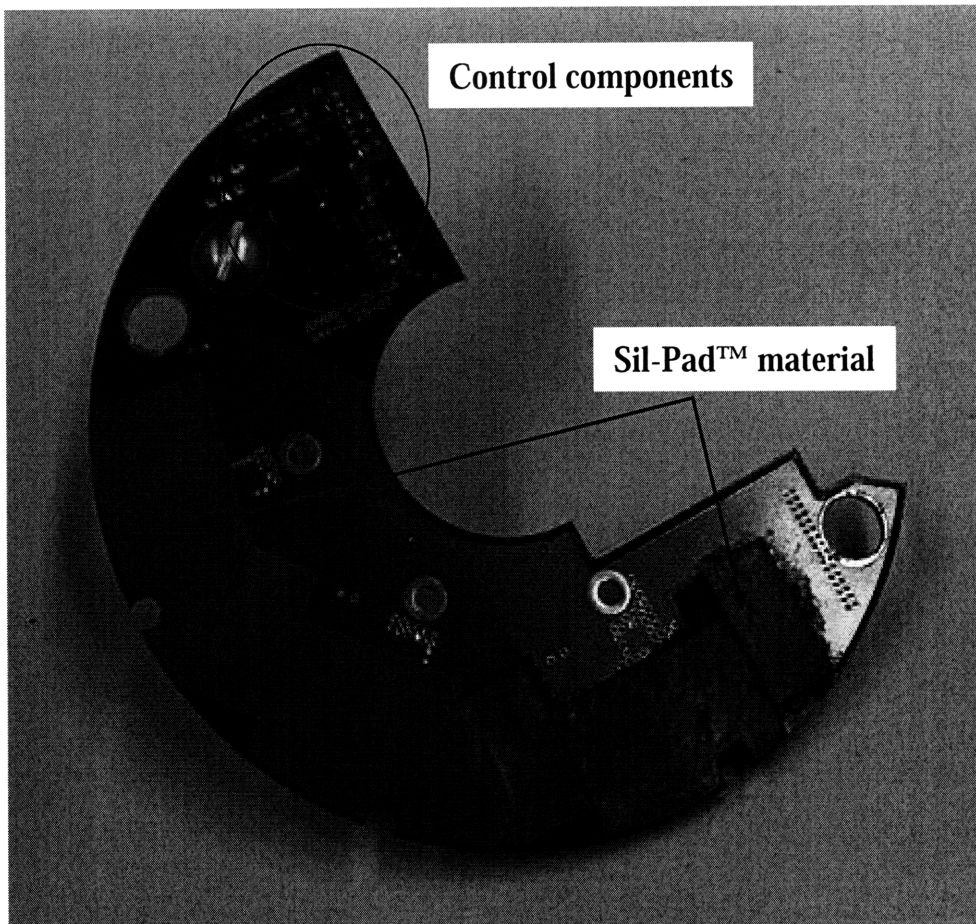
Bottom view of PCB with Sil-Pad™ material
